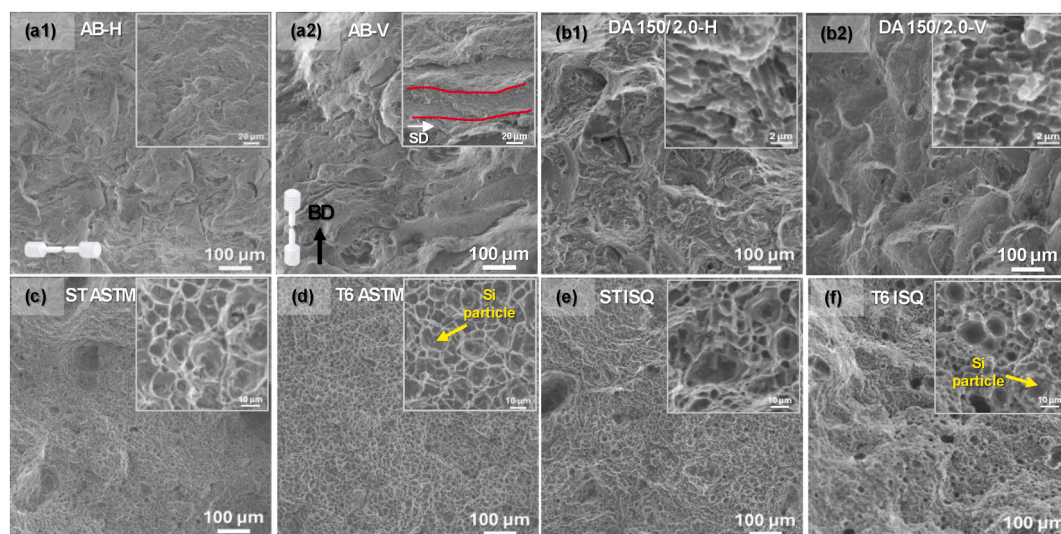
Fracture surfaces of AB (a1–a2) and DA 150/2.0 (b1–b2) conditions, and fracture morphology after (c) ST ASTM, (d) T6 ASTM, (e) ST ISQ, and (f) T6 ISQ treatments.
